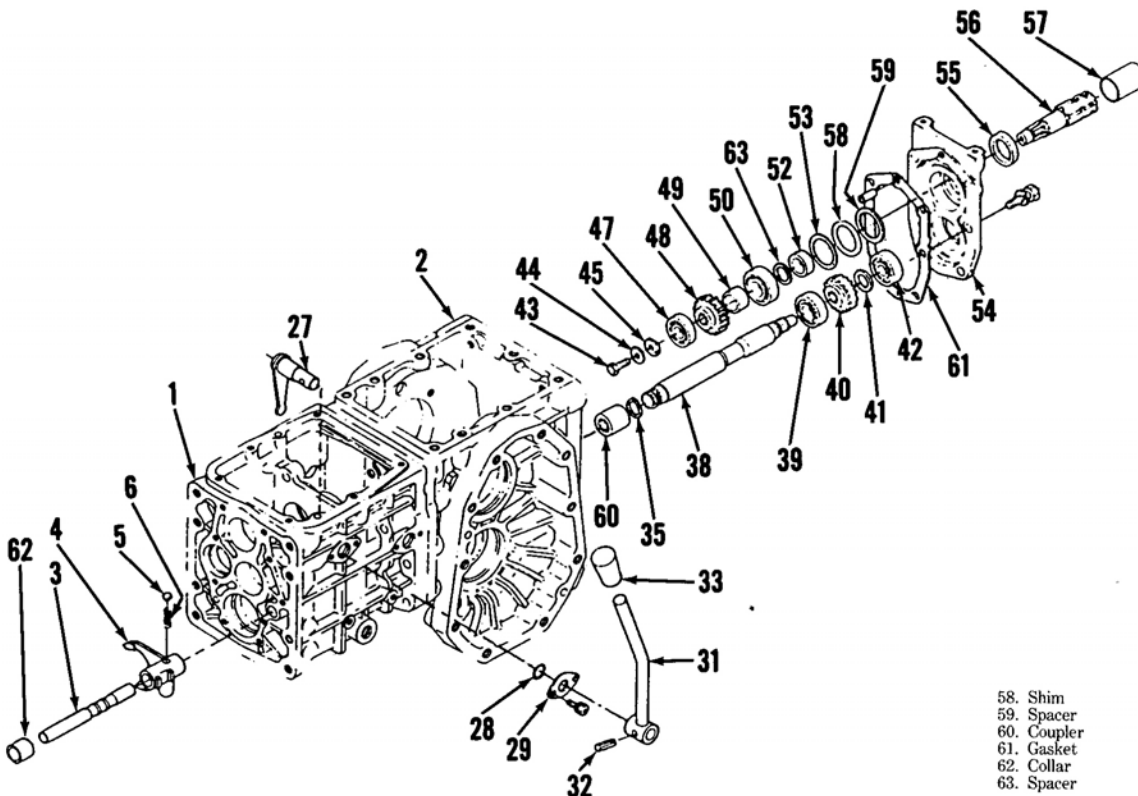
Exploded view of pto components used on Models B5100D and B5100E. For identification of parts, refer to legend in Fig. 88 except for the following.
